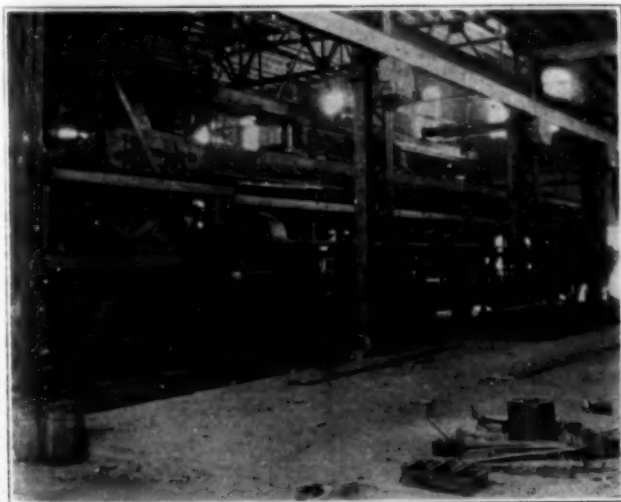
GENERAL VIEW—PALLETs LOADED WITH PIG IRON FOR TESTING PURPOSES
